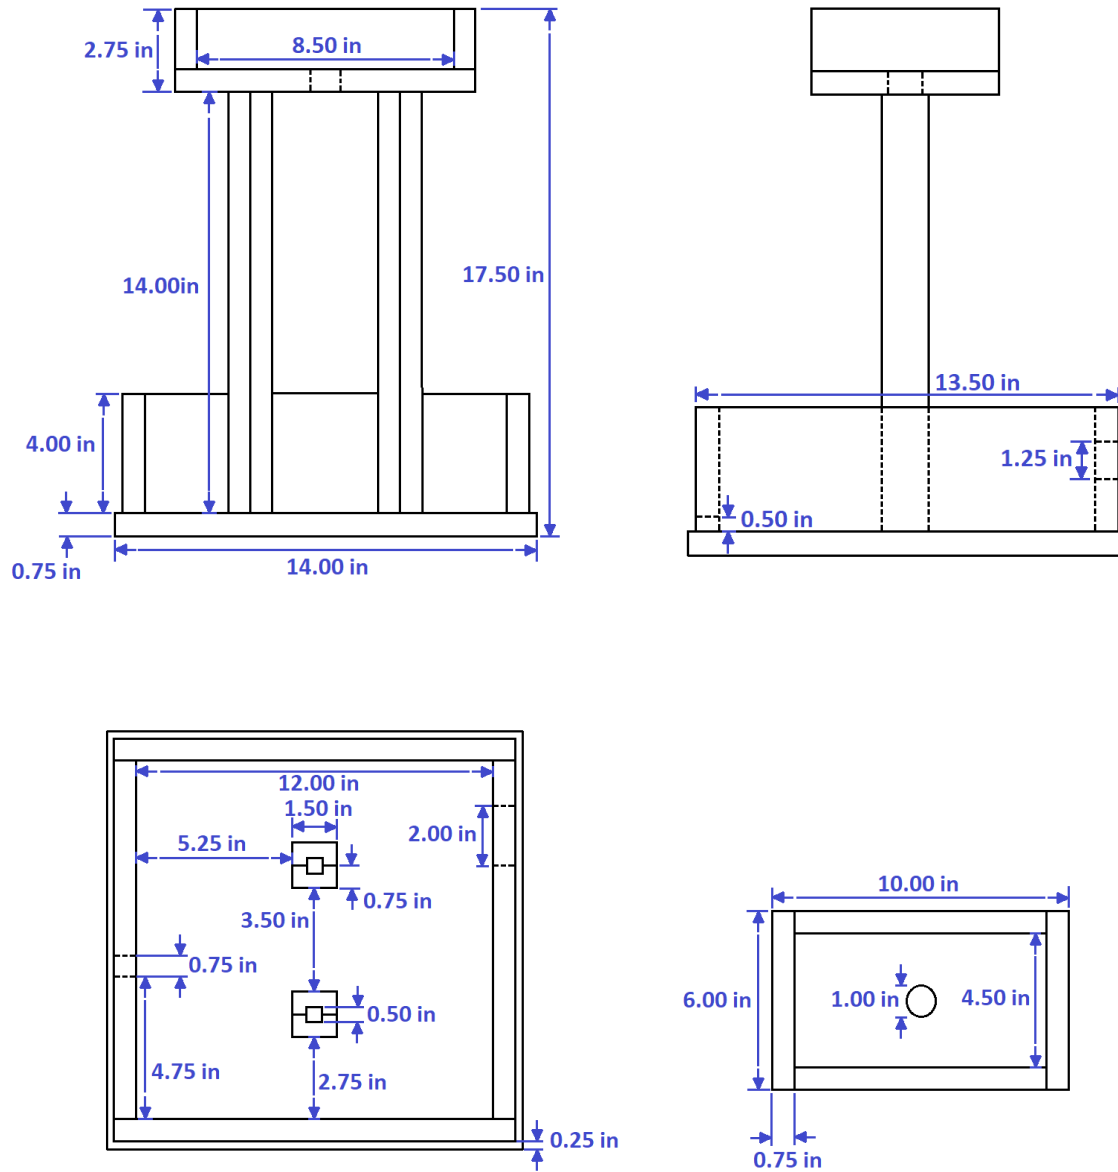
Dimensions of the Enclosure. Starting from the top left: front view, side view, overhead view of bottom box, overhead view of top box.
